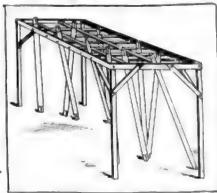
HANDY RACK FOR REAR AXLE SHAFTS
